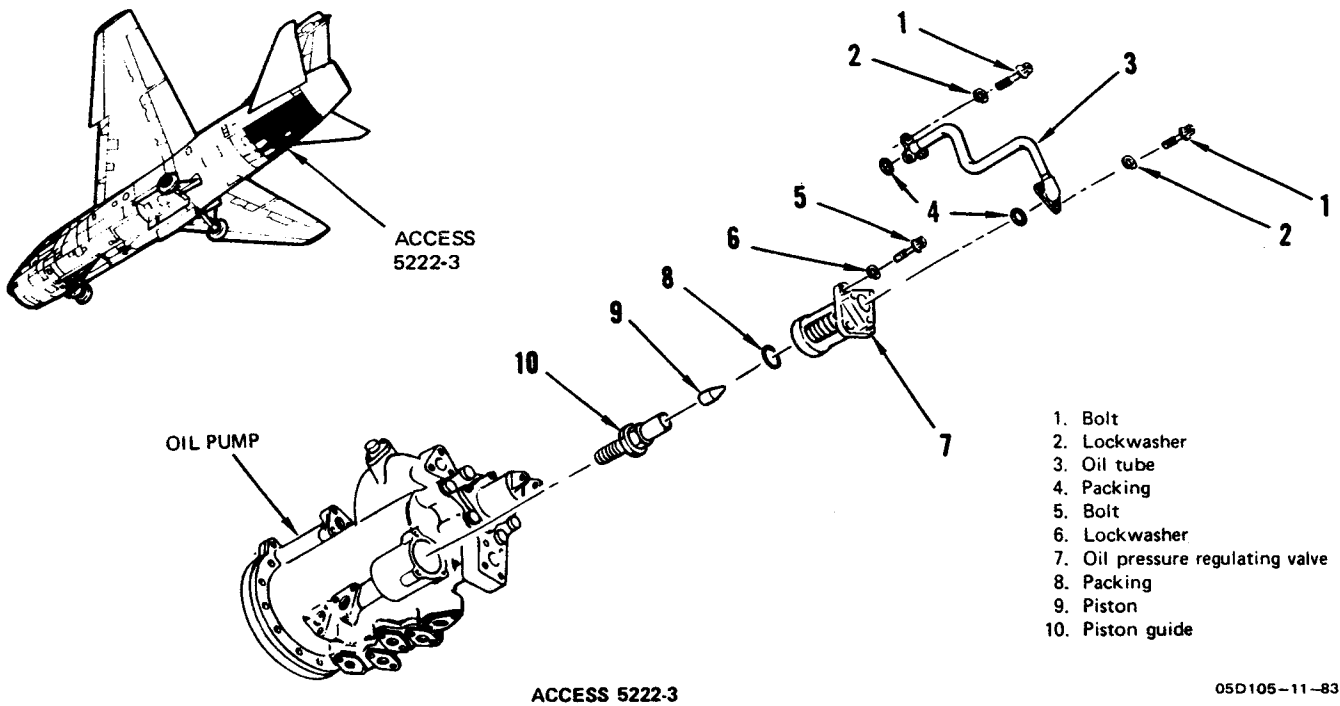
Removal and Installation; Oil Pressure Regulating Valve
